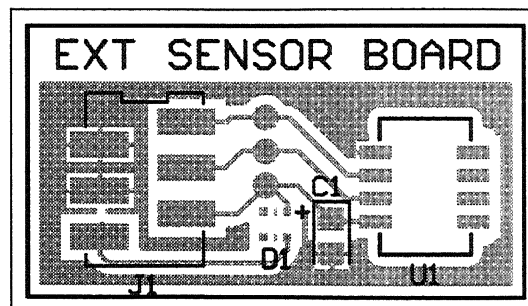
Drawing of the PCB of the external sensor daughter board
